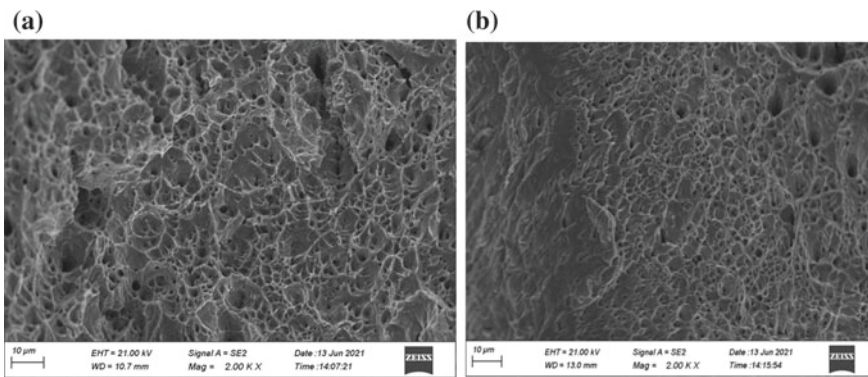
a Fracture in tube base metal and b fracture in tube weld zone
